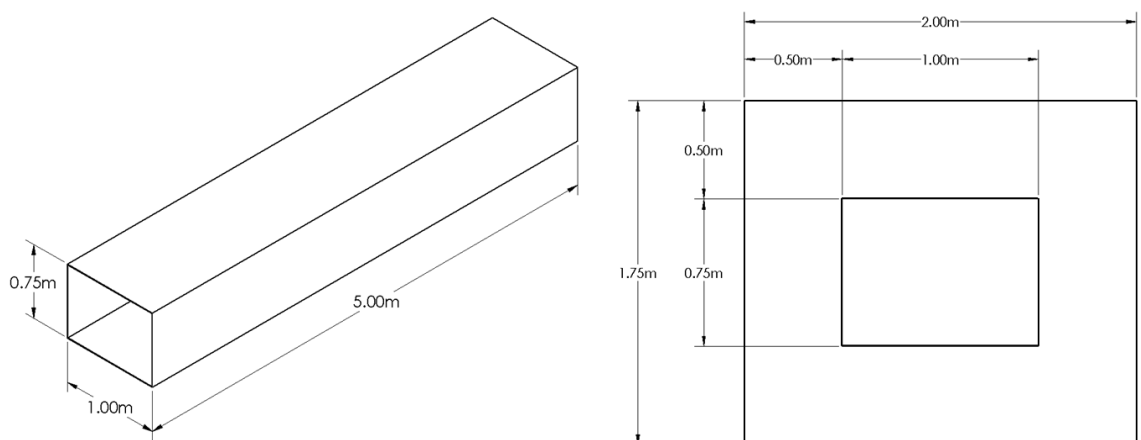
Mechanical drawings of the duct (left) and substructure (right)
